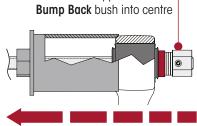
Severe-duty Bush Tool Configuration AFTER Bump Back
